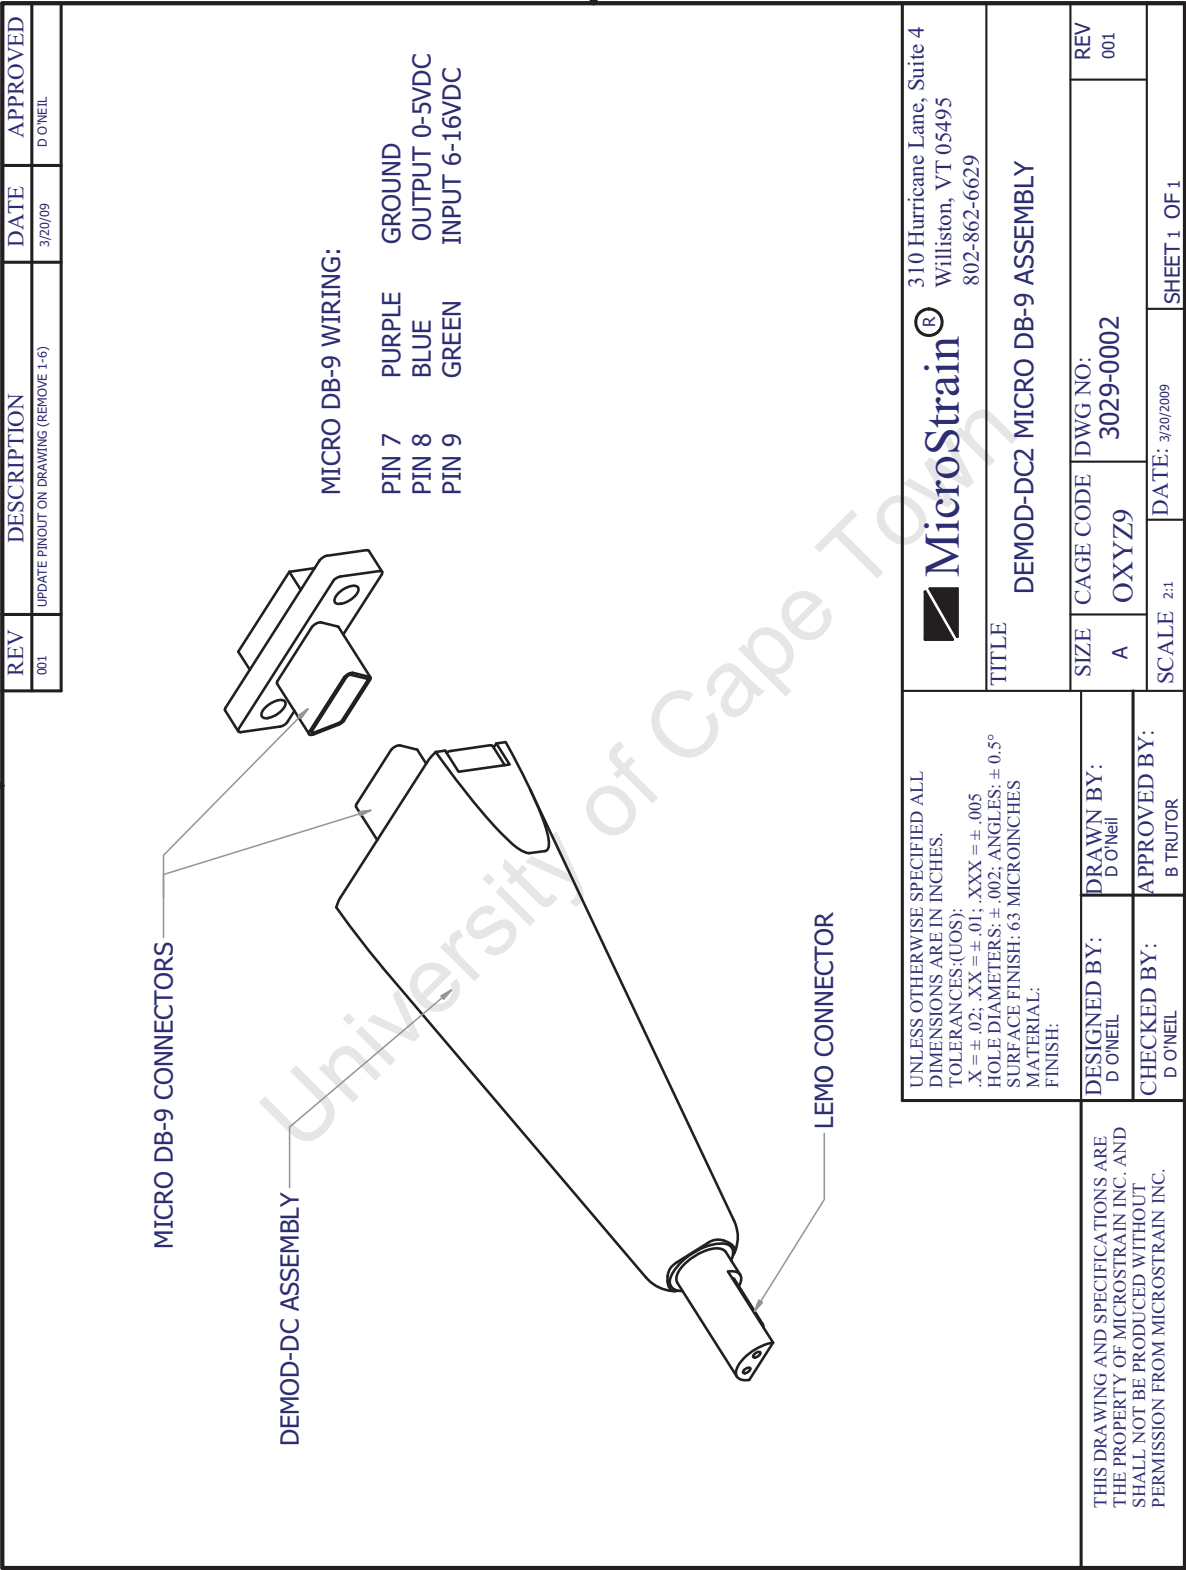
Technical Drawing: Microstrain Signal Conditioner DEMOD-DC.
